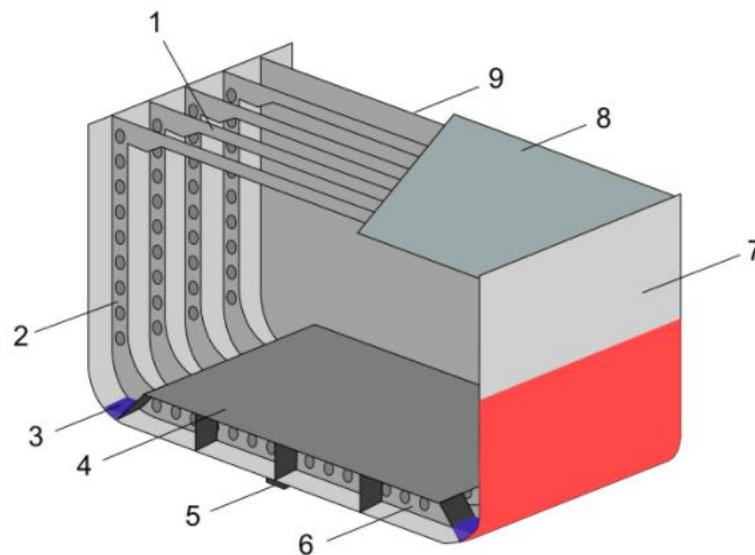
Transversely-framed ship. 1. Beam 2. Frame 3. Bilge 4. Inner Bottom 5. Keel 6. Outer bottom 7. Shell plating 8. Deck plating 9. Bulkhead. Source: (Naval Gazing, 2021)
